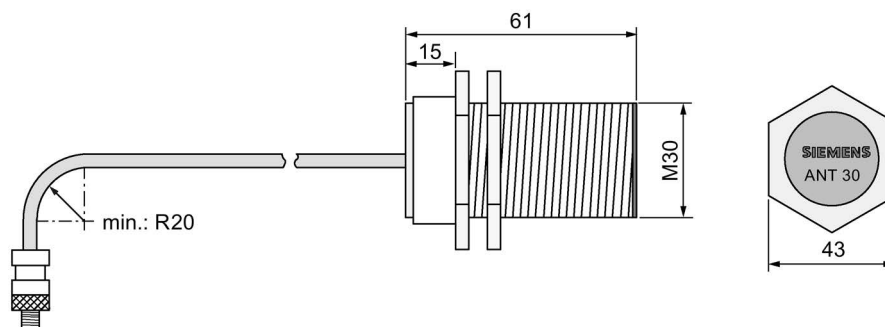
Dimension drawing ANT 30 (all values in mm)
